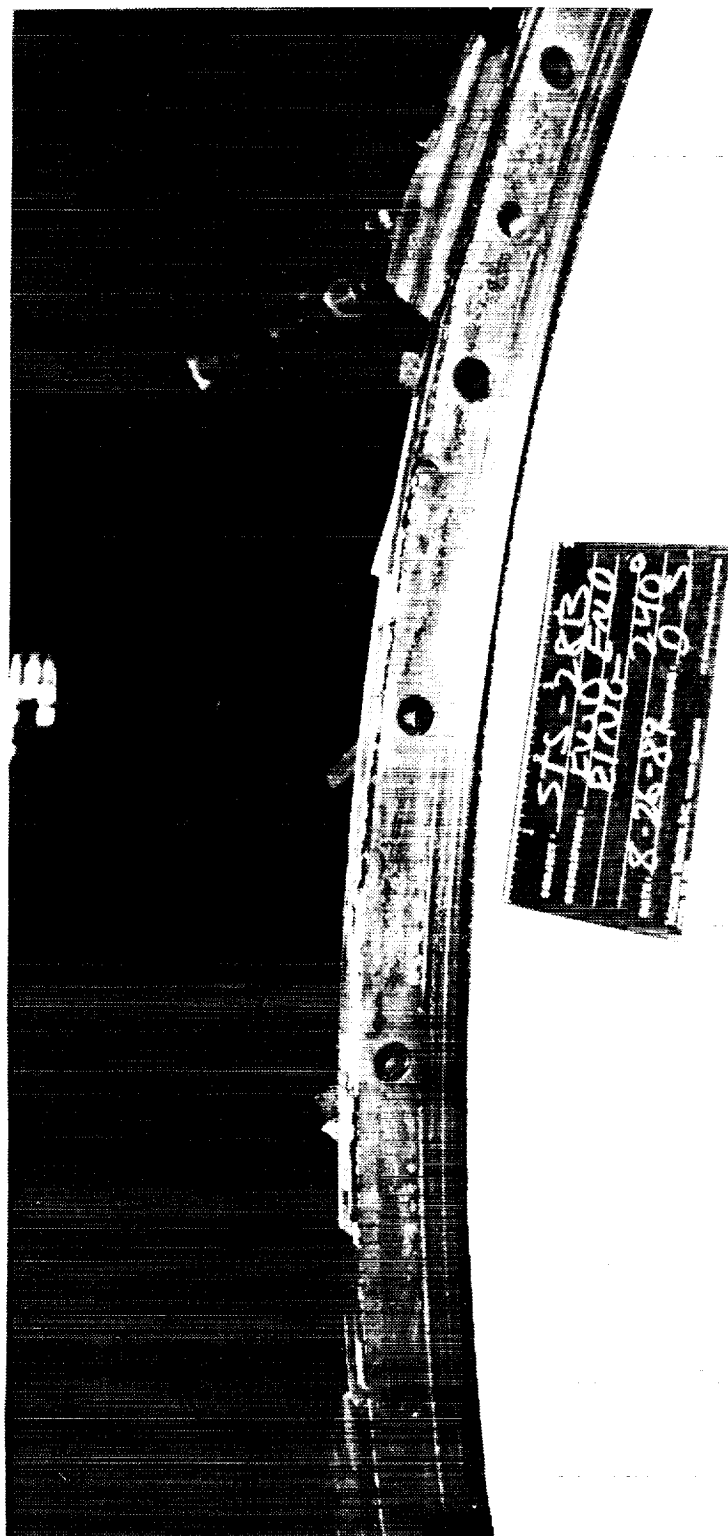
STS-28B Bearing Forward End Ring (240 deg)
